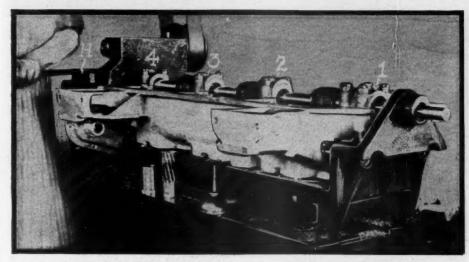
THOMAS METHOD OF REAMING FOUR CRANKSHAFT BEARINGS AT ONCE
